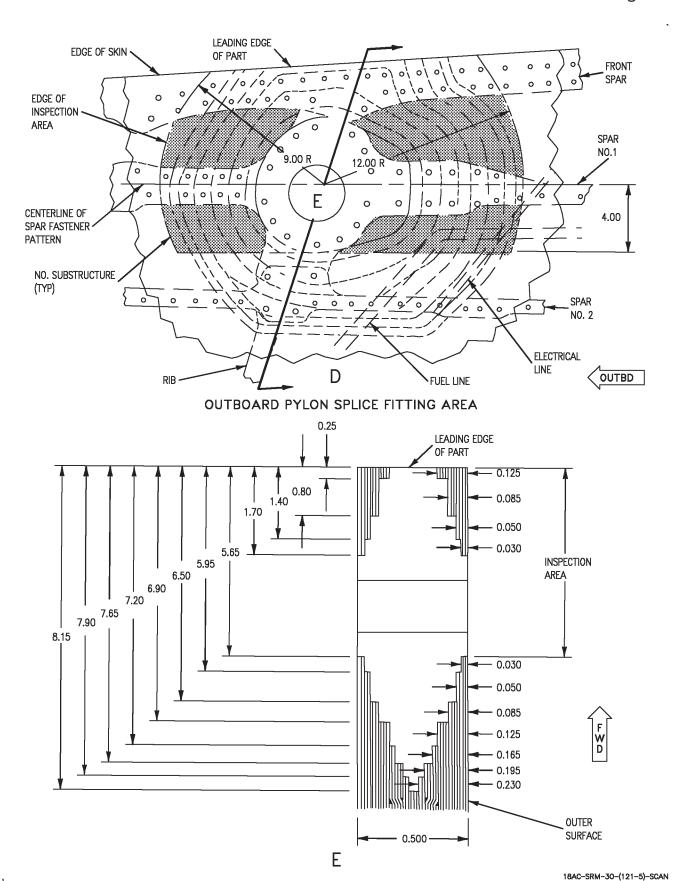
Inner Wing Upper Surface Titanium Splice Fitting Inspection Areas (Sheet 5)
